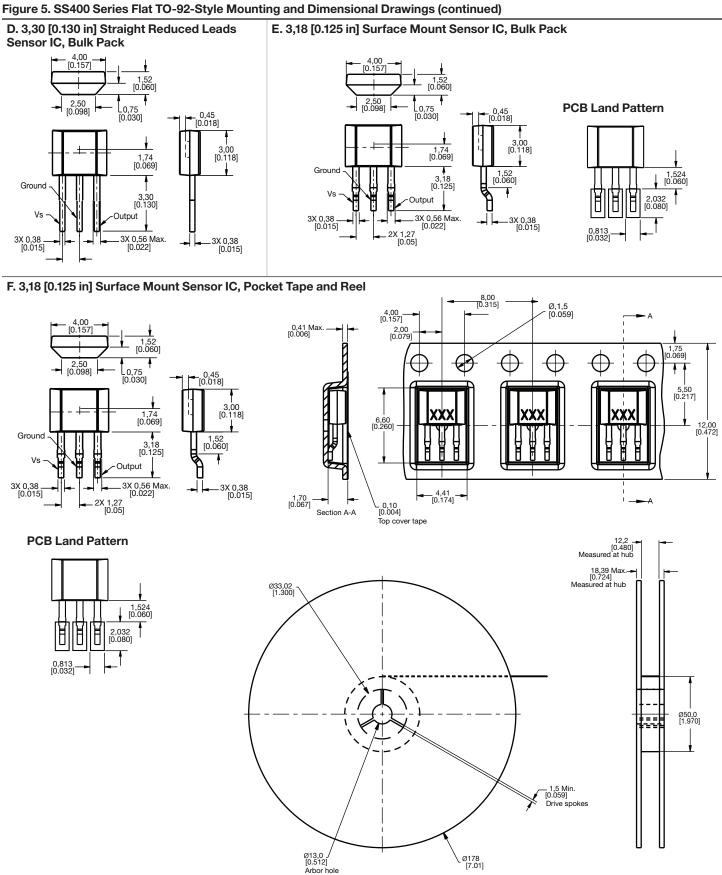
SS400 Series Flat TO-92-Style Mounting and Dimensional Drawings (For reference only: mm/[in].)
